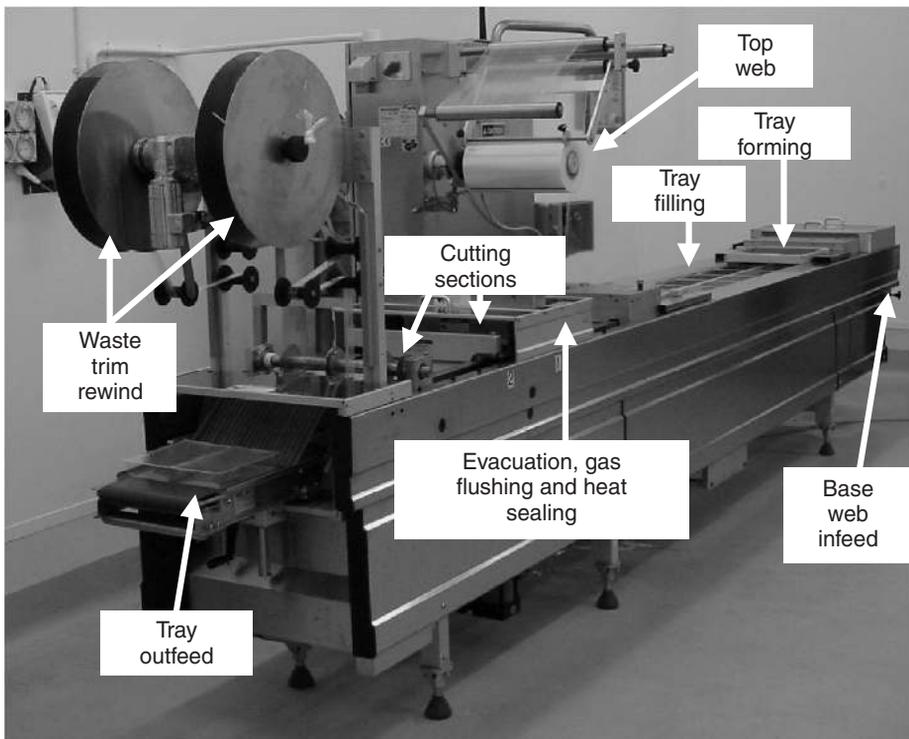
Thermoform fill seal machine. (Courtesy of Multivac.)
